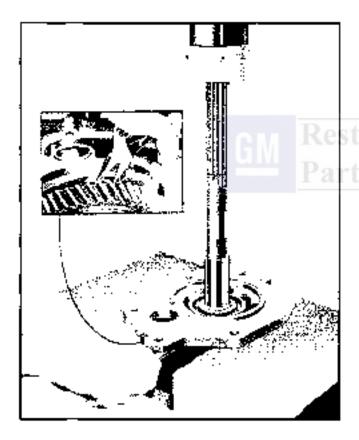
Pressing Mainshaft from Rear Bearing Relainer
